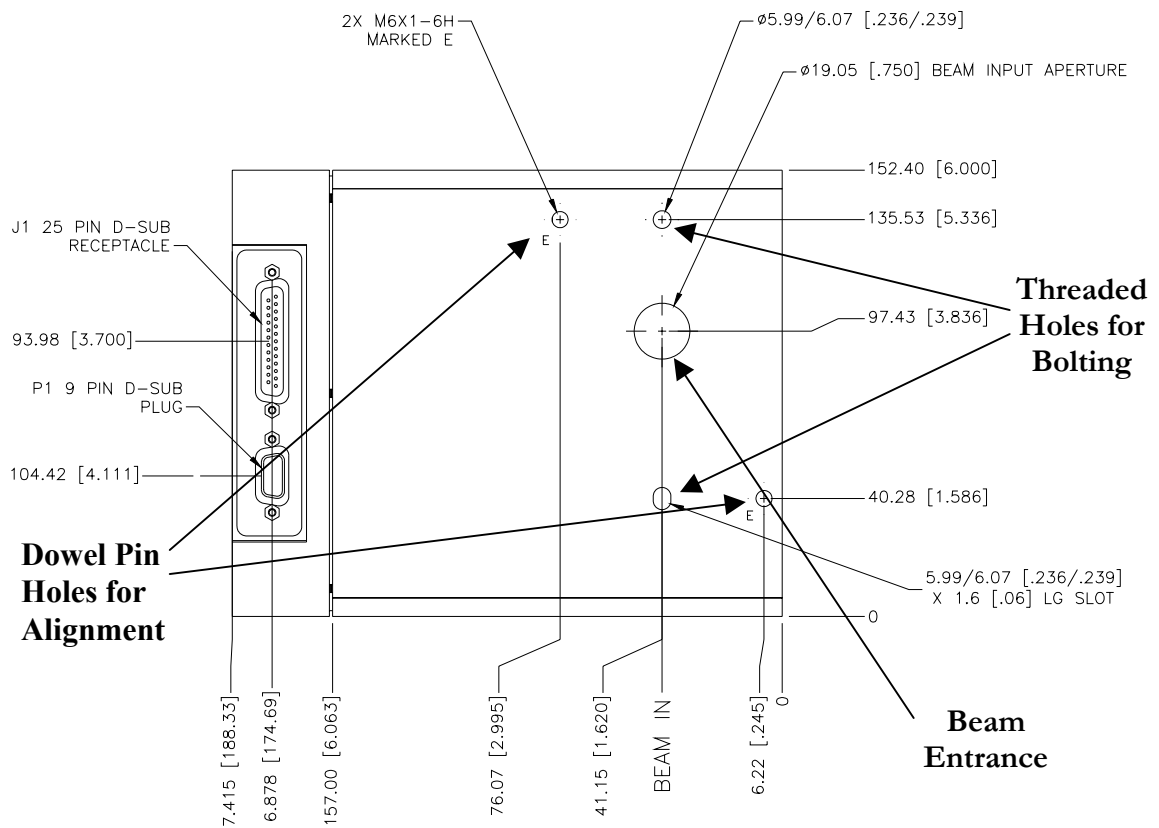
The mounting holes are located on the Beam Input side of the HSM15M2 assembly. For complete dimensions see [APPENDIX B: Outline Drawings](#).
